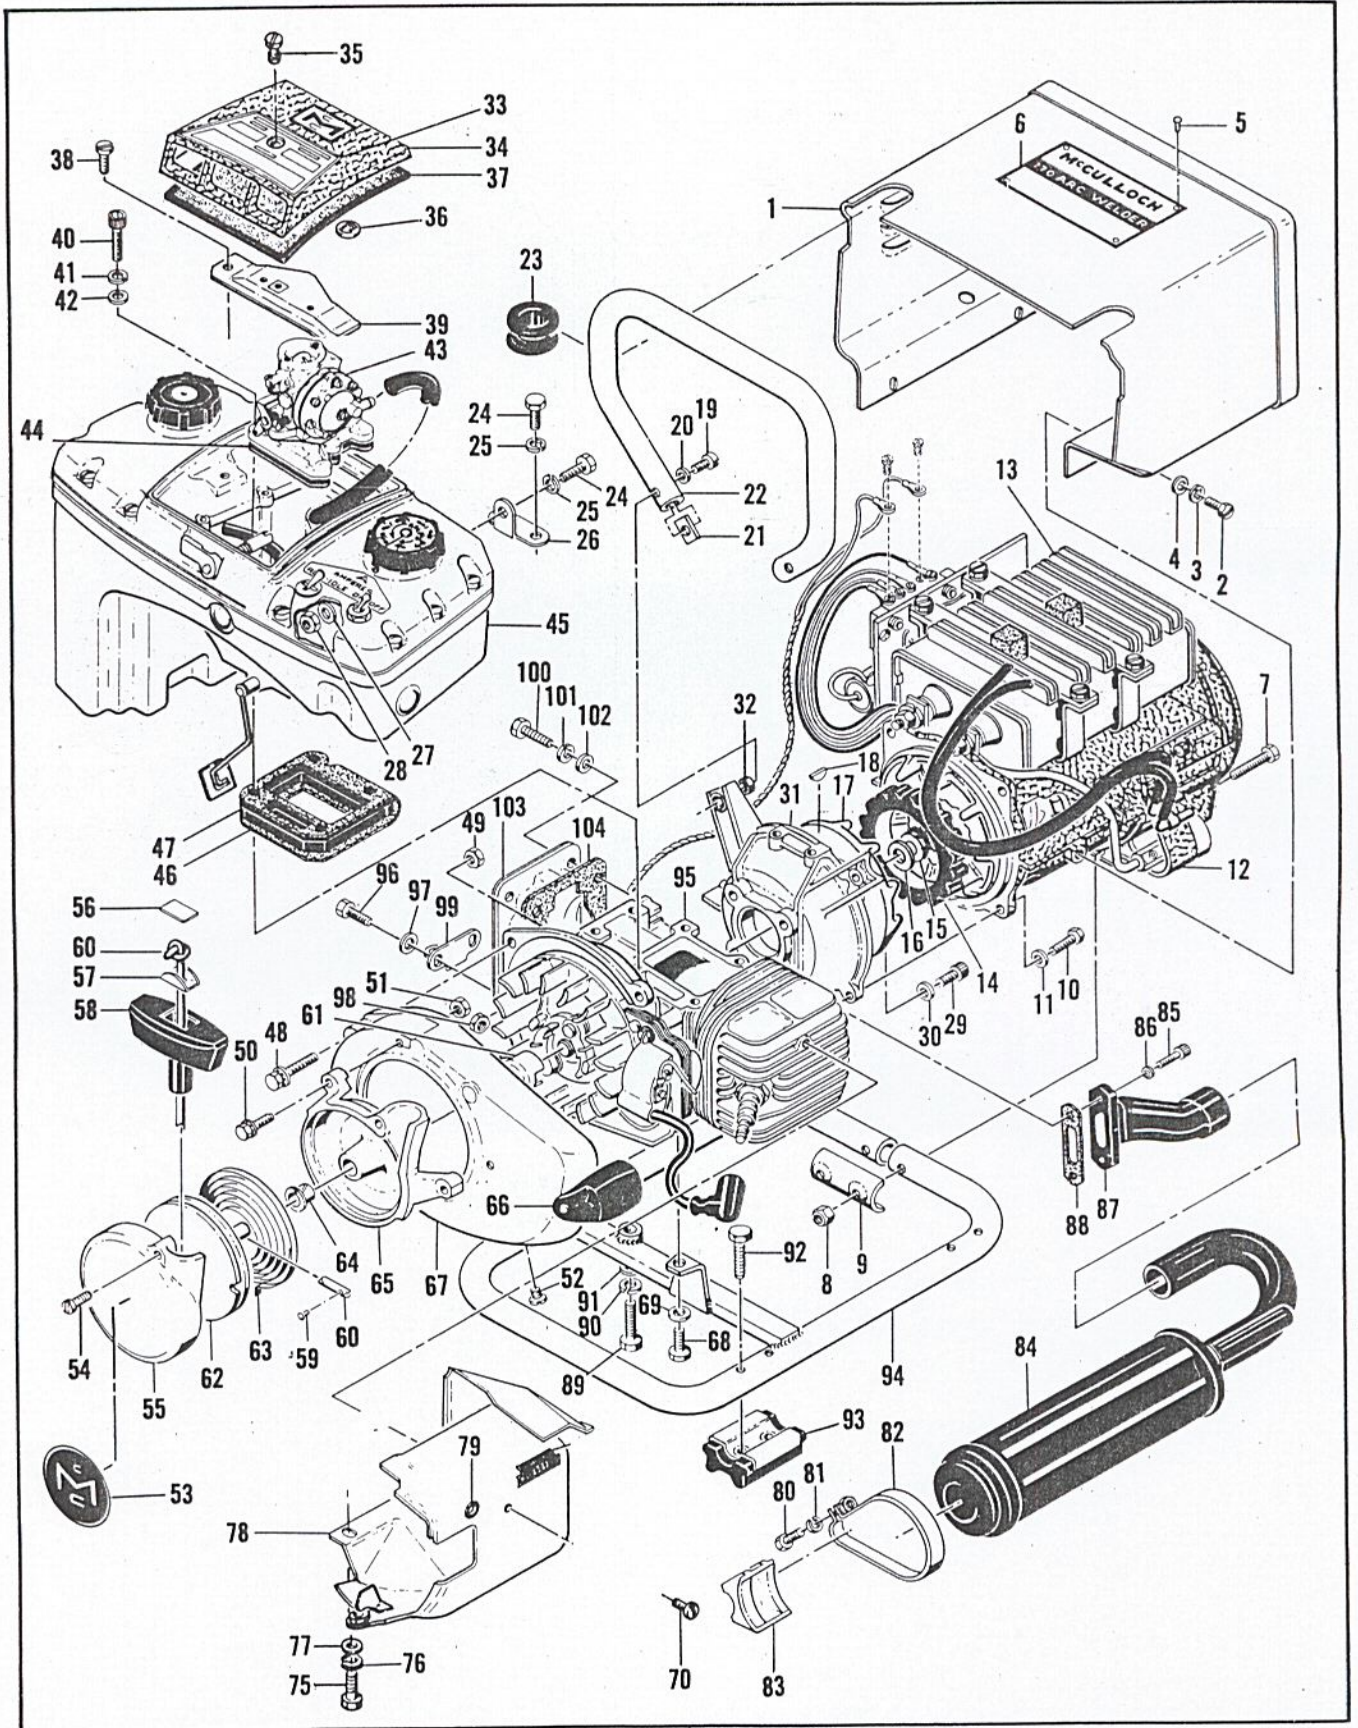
McCulloch 170 Arc Welder - Exploded View
